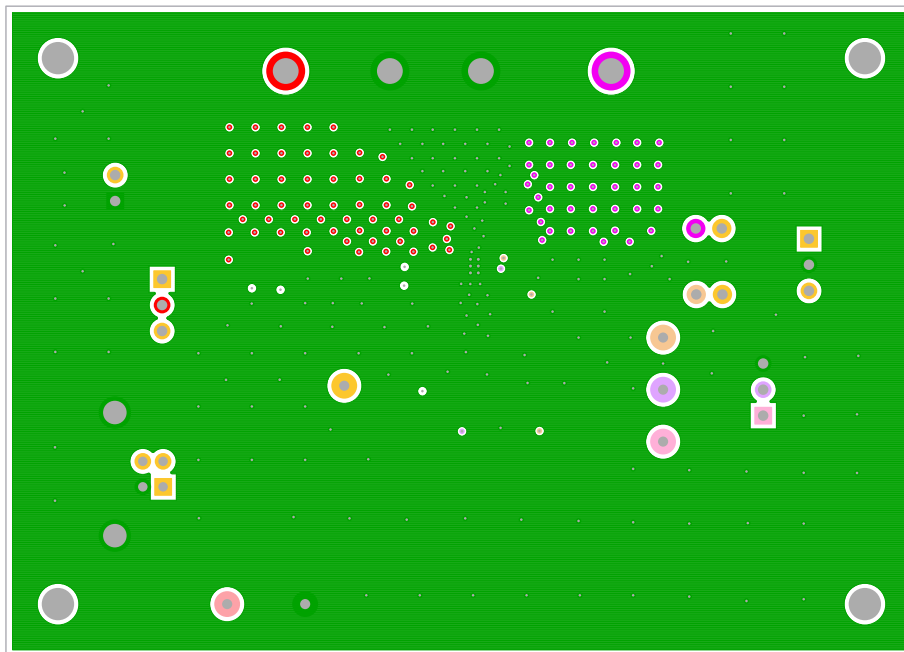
BOTTOM LAYER SOLDER SIDE
